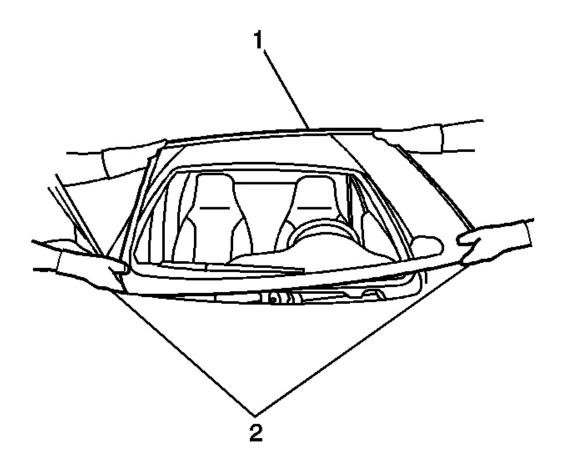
Removing/Installing Windshield Courtesy of GENERAL MOTORS CORP.
